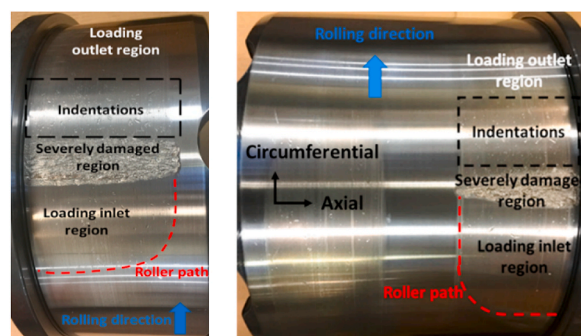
The investigated inner races of 2 MW wind turbine gearbox bearings, upwind race (on left hand side) and down-wind race (on the right).
